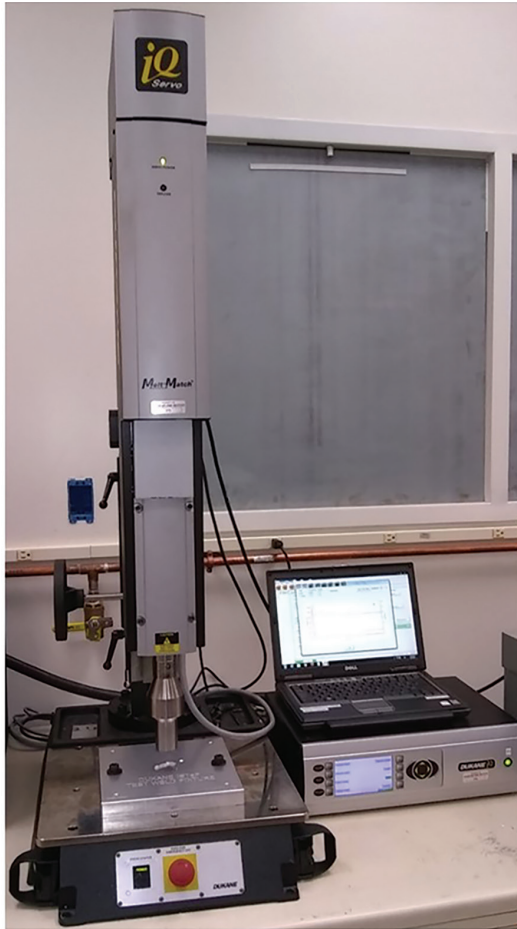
Servo-driven ultrasonic welding machine.
